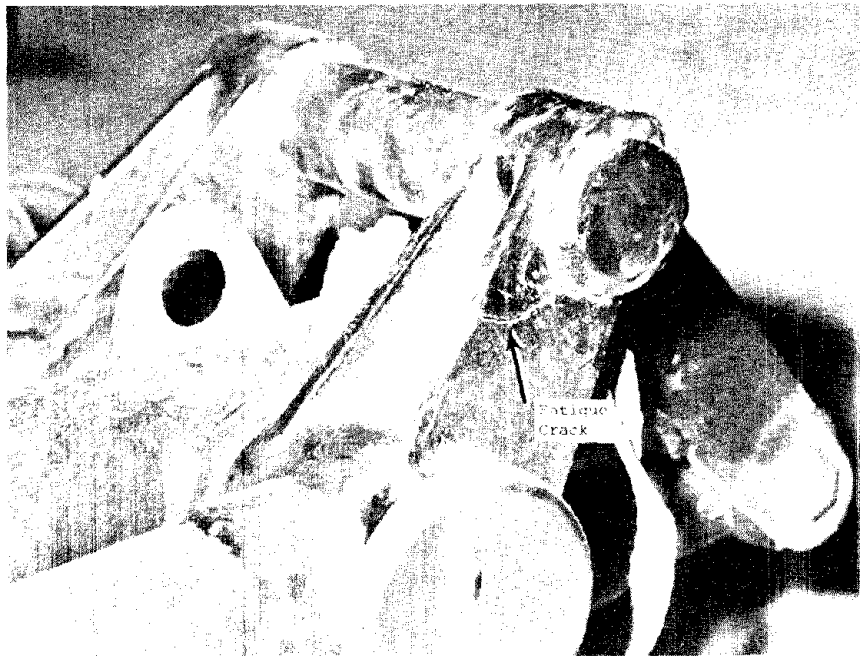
FAIVELEY DS 11 PANTOGRAPH FAILED KNUCKLE ASSEMBLY.
